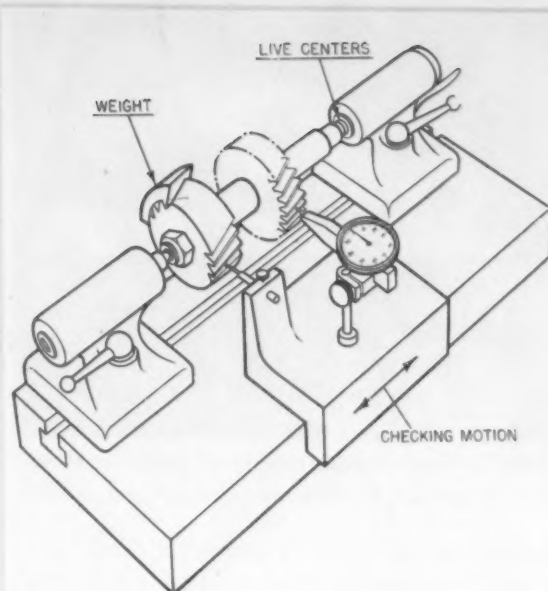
Lead gage can be used to check lead of helical gear. Other leads check spur gears.
